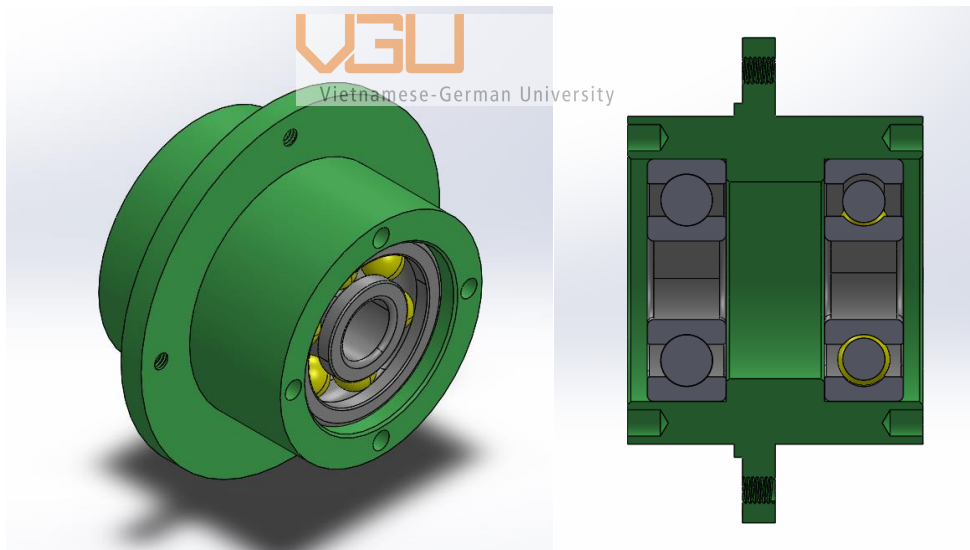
MRB shaft with SKF_6301 deep groove ball bearing CAD
